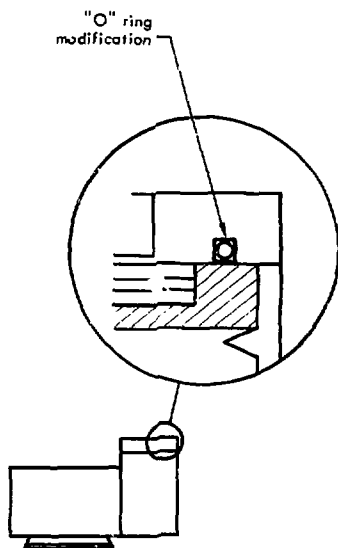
Welded bellows positive displacement pump, modified.
